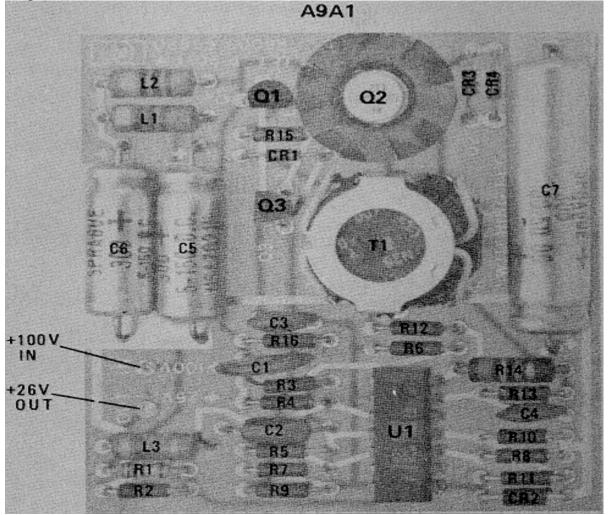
Switching Regulator Board Assembly A9A1 (08555-60098)
